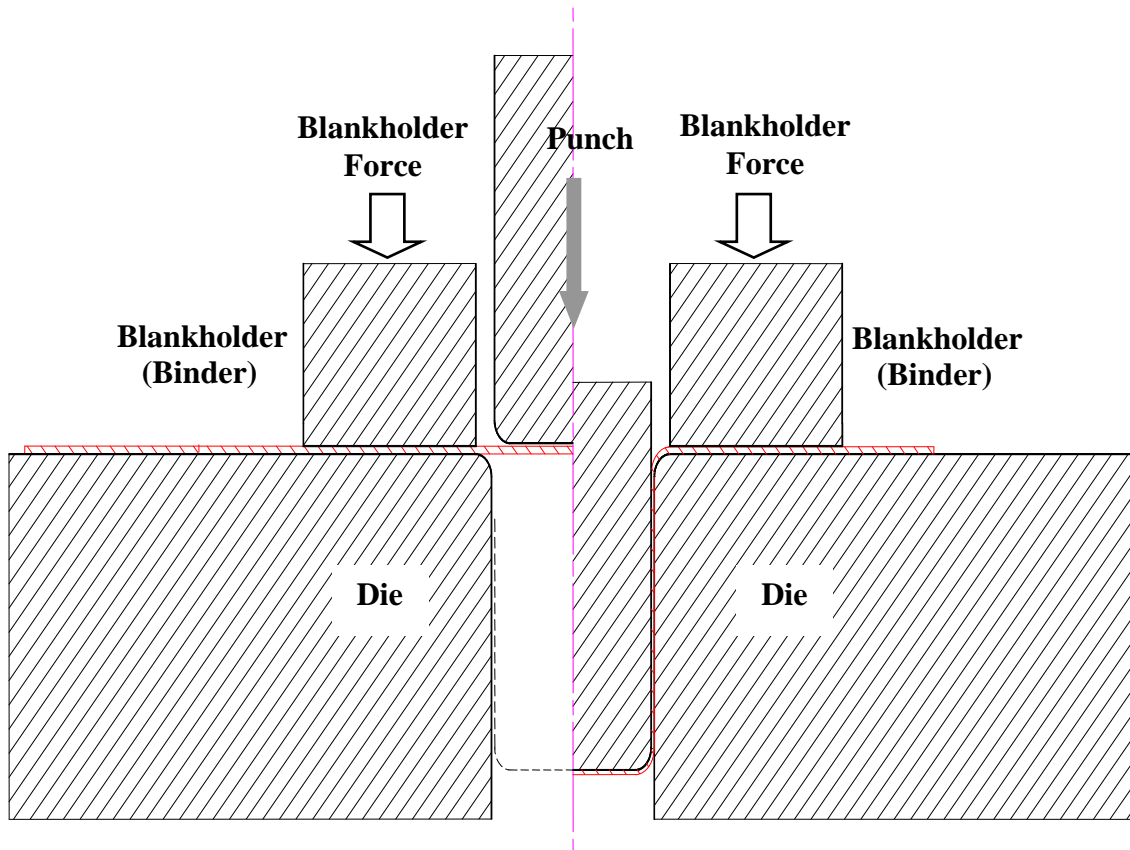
Initial tool setup for Sheet Metal Forming Process
